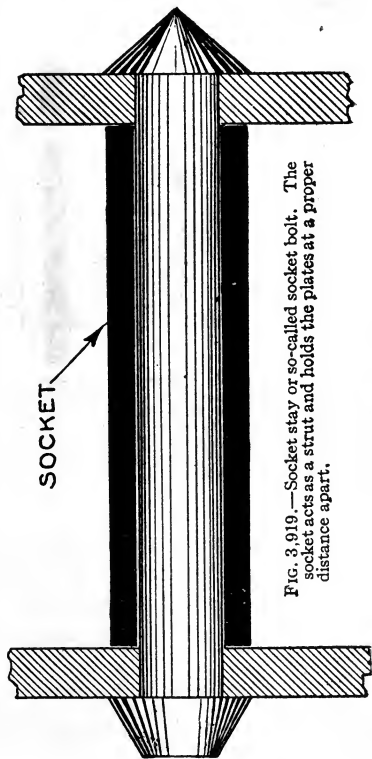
,919.—Socket stay or so-called socket bolt. The socket acts as a strut and holds the plates at a proper distance apart.
